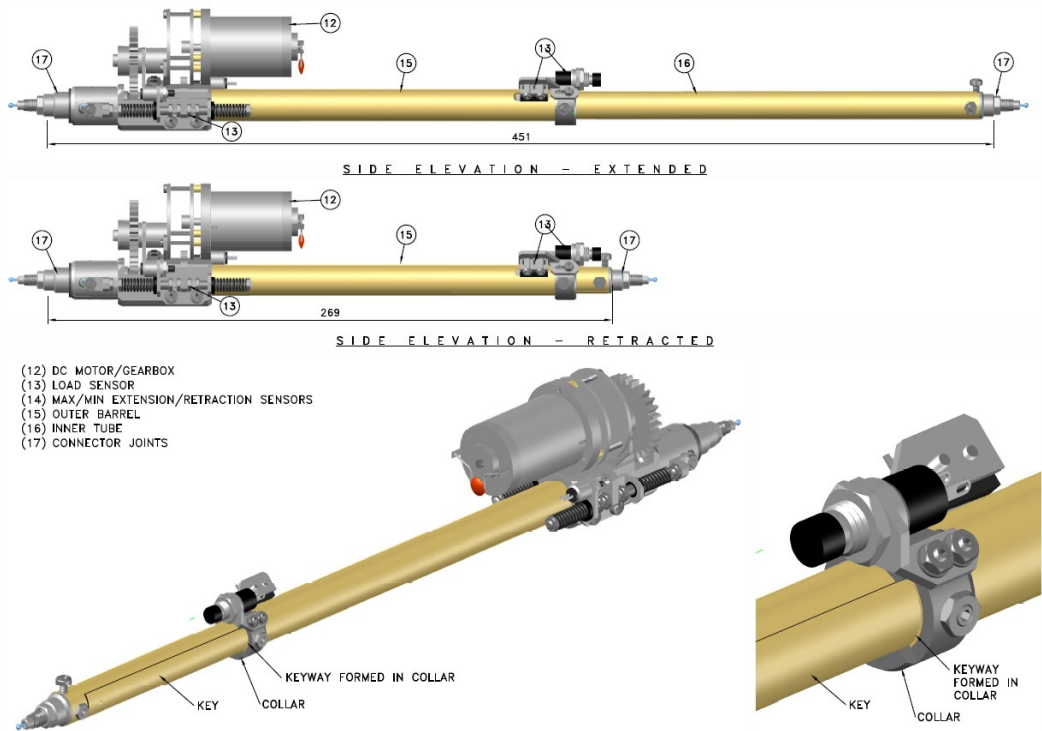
Real view drawing of the completed linear actuator at minimum contraction and maximum extension (top), mechanism using key and keyway to prevent the actuator tubes from rotation (bottom).
